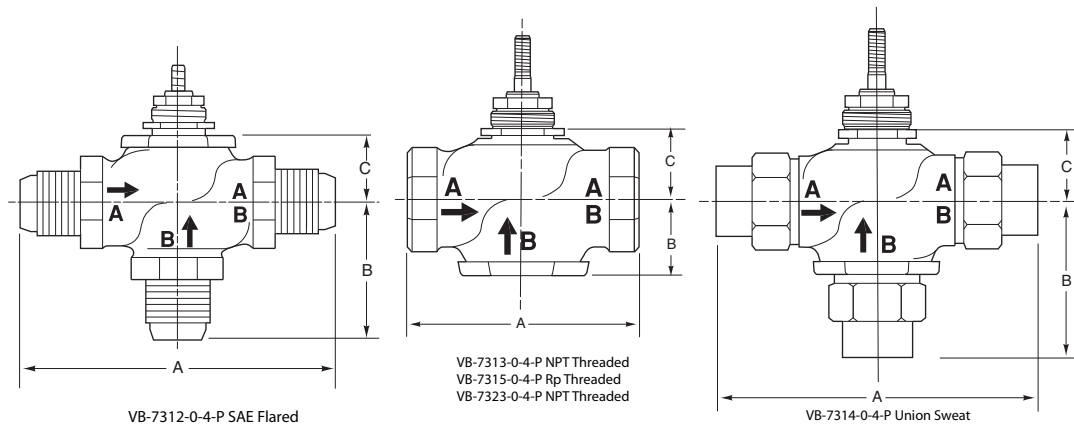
Three-Way VB-73xx Valve Body Dimensions
